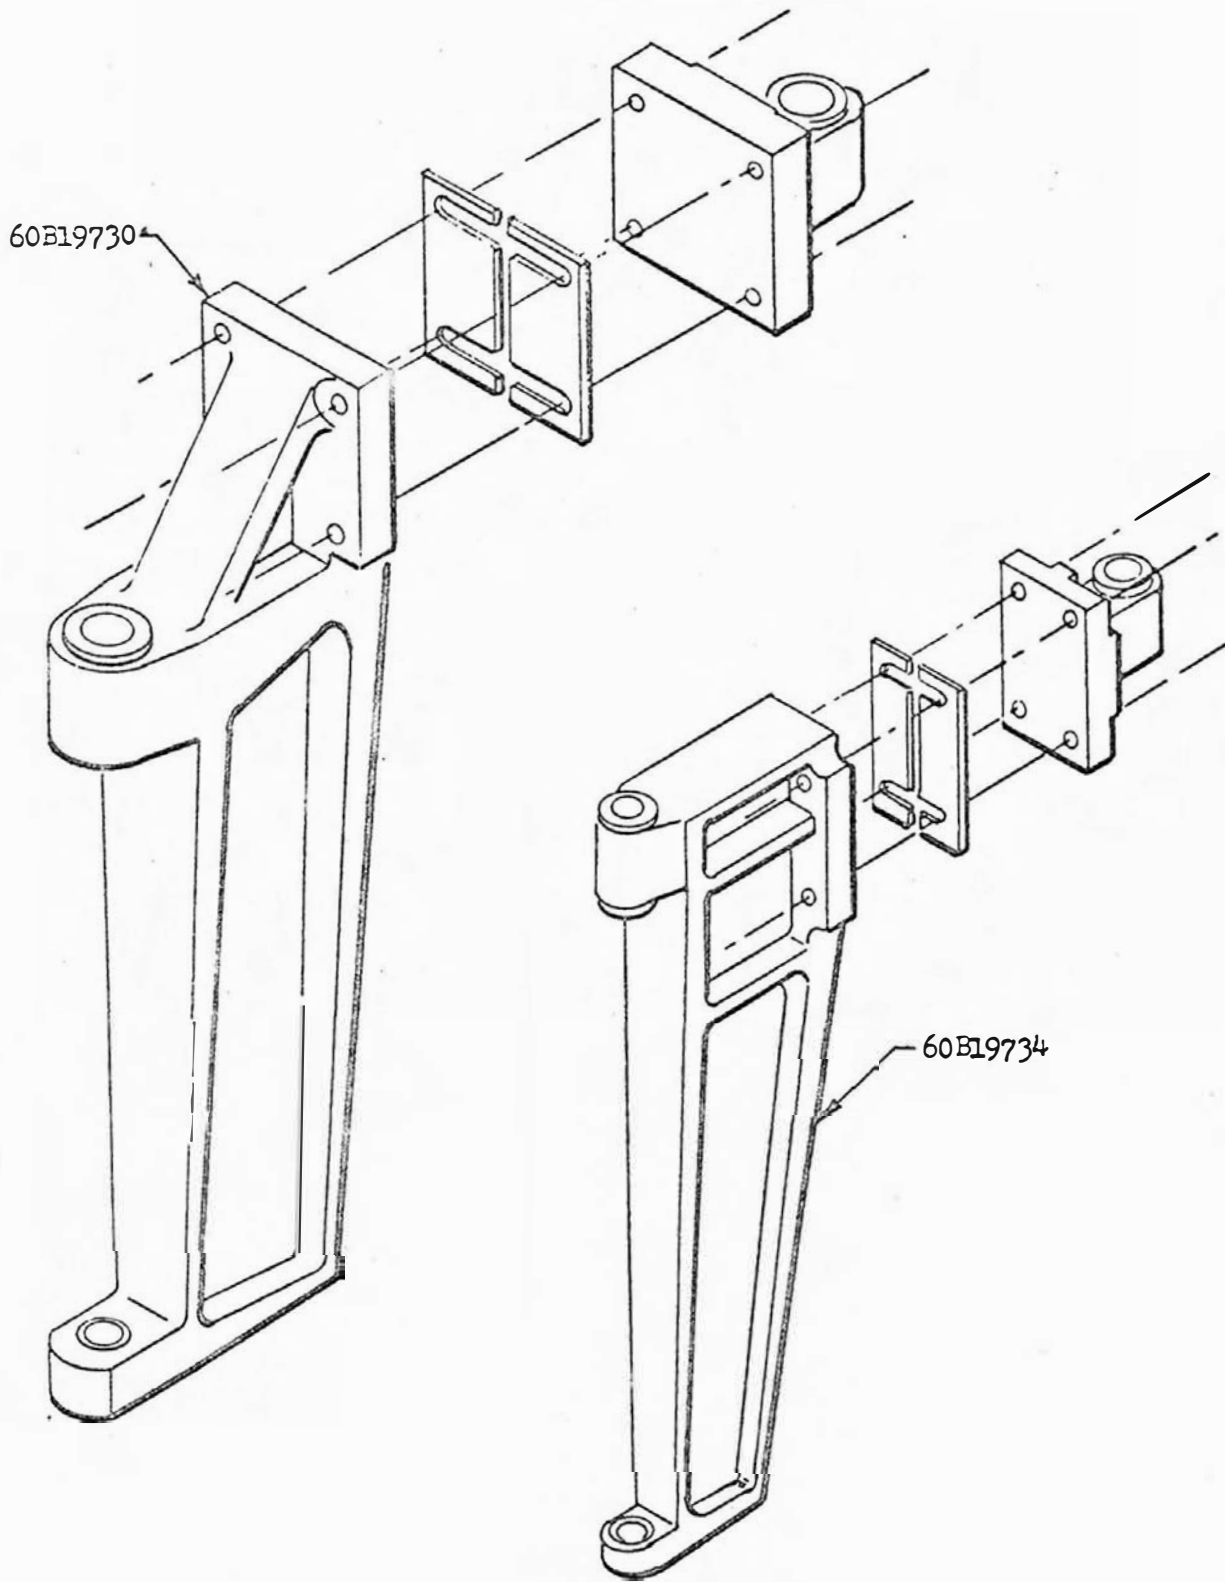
Outboard Propellant Duct Support Link Assemblies
